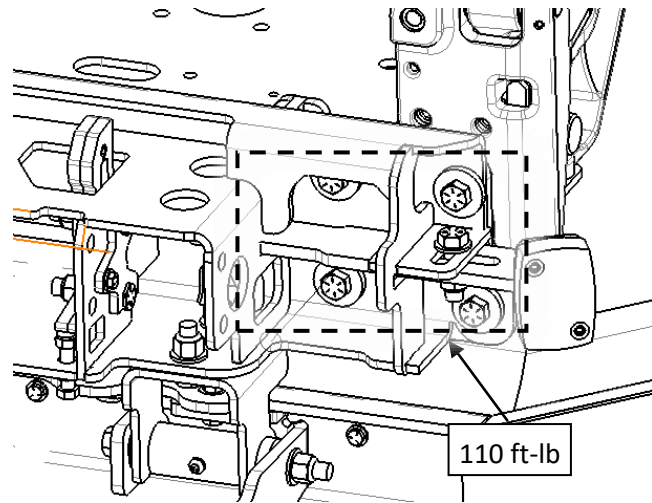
Side Bracket Bolt Torque Specs (Driver Side Shown)
